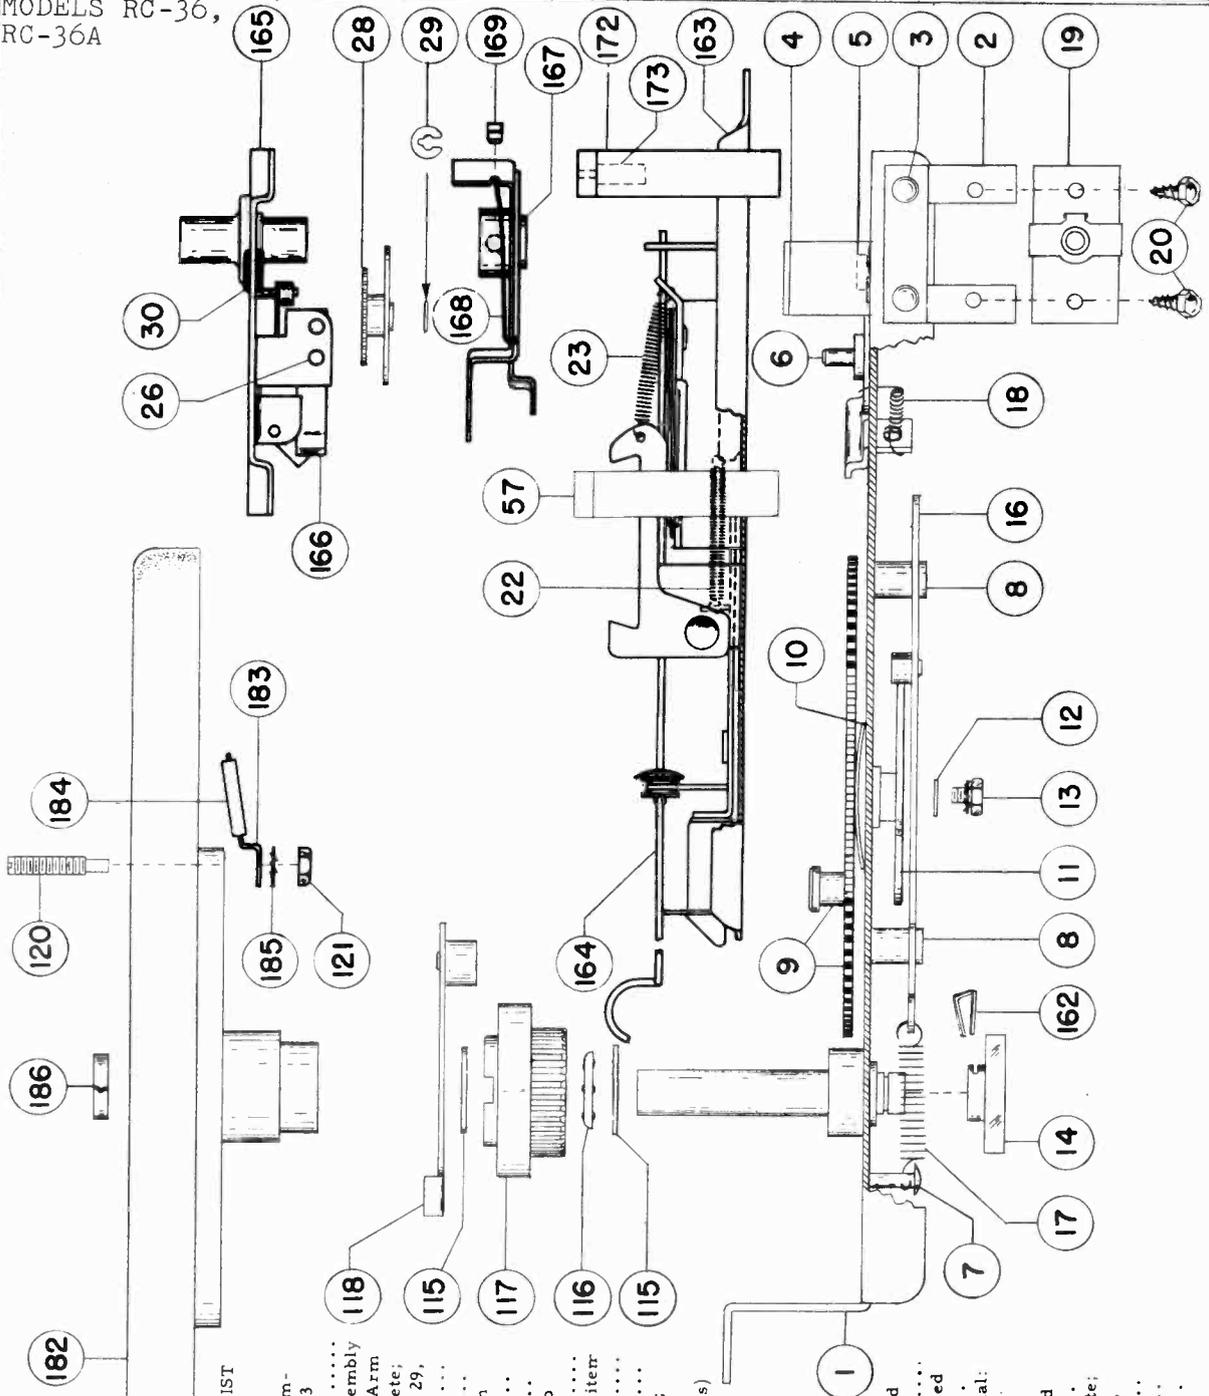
DISASSEMBLED VIEW OF RC-36A RECORD CHANGER MECHANISM
